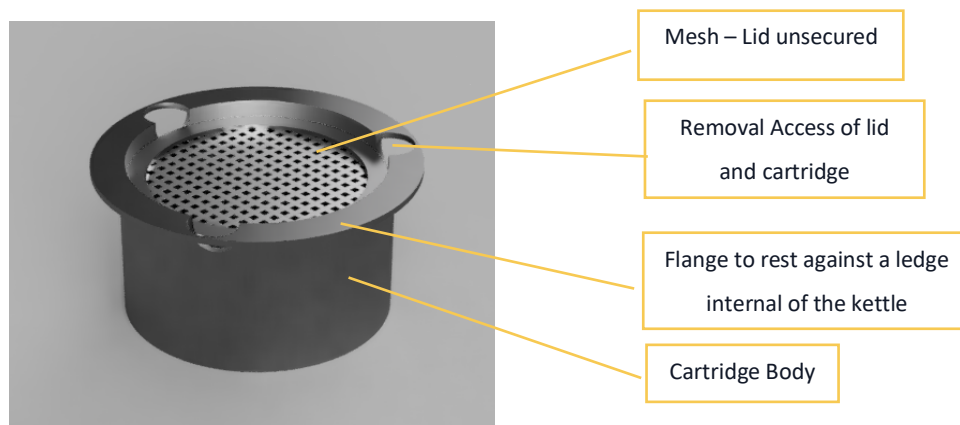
CAD Iteration 1, based off basic cardboard prototype.
